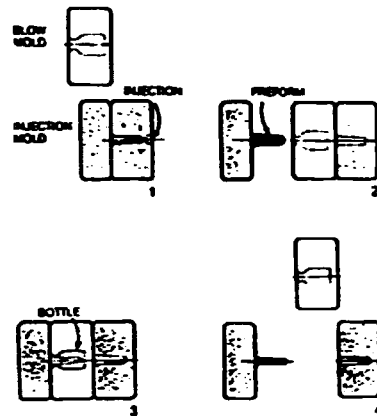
Basic shuttle-type injection blow molding process (using conventional injection molding machine; Husky Machine Co.). (1) Preform injection molded; (2) blow mold moves into position; (3) blow cycle; (4) blow mold raised with finished parts.
